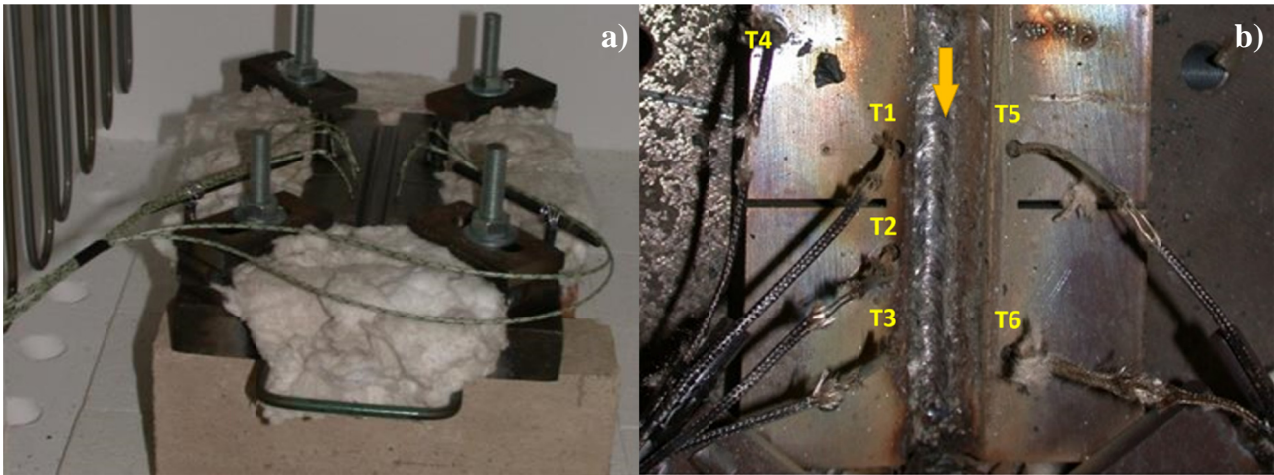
View of the sample before welding placed in the furnace a) and after the welding process with visible thermocouples b)
